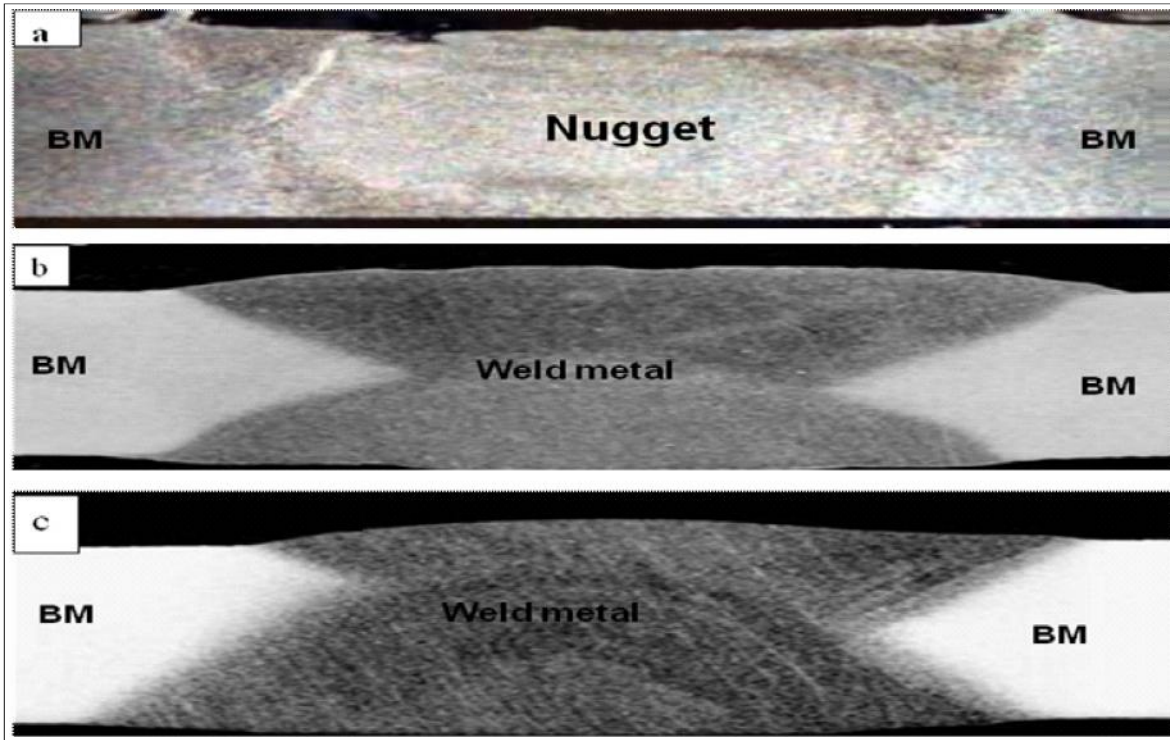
Weld cross-section macro of Al pipe 6061 at (a) FSW (b) TIG (c) MTIG
